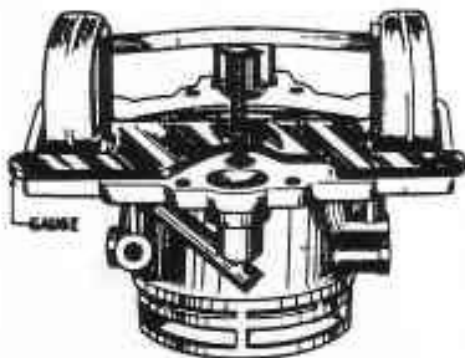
CHECKING FLOATS. (Tool No. T 24971).
